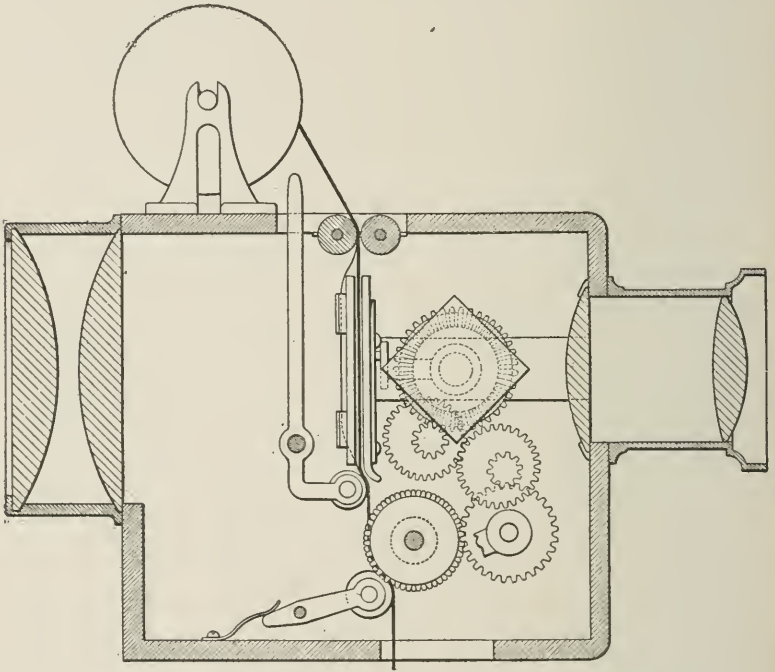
Projecting Machine for Continuous Projection by Moving Prism
